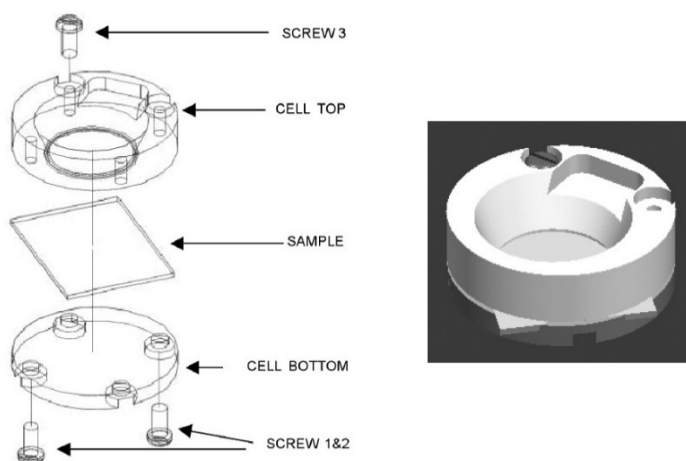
EC-STM fluid cell, exploded (left) and assembled (right).
